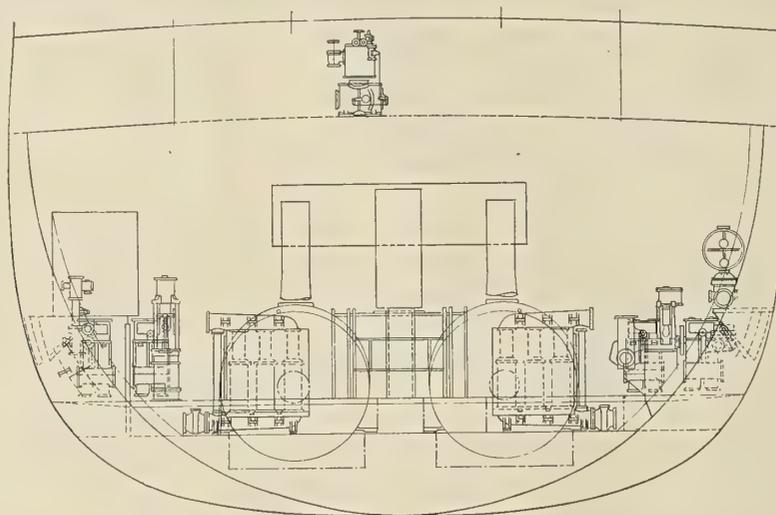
ELEVATION LOOKING FORWARD FROM FRAME 173 TO FRAME 163
